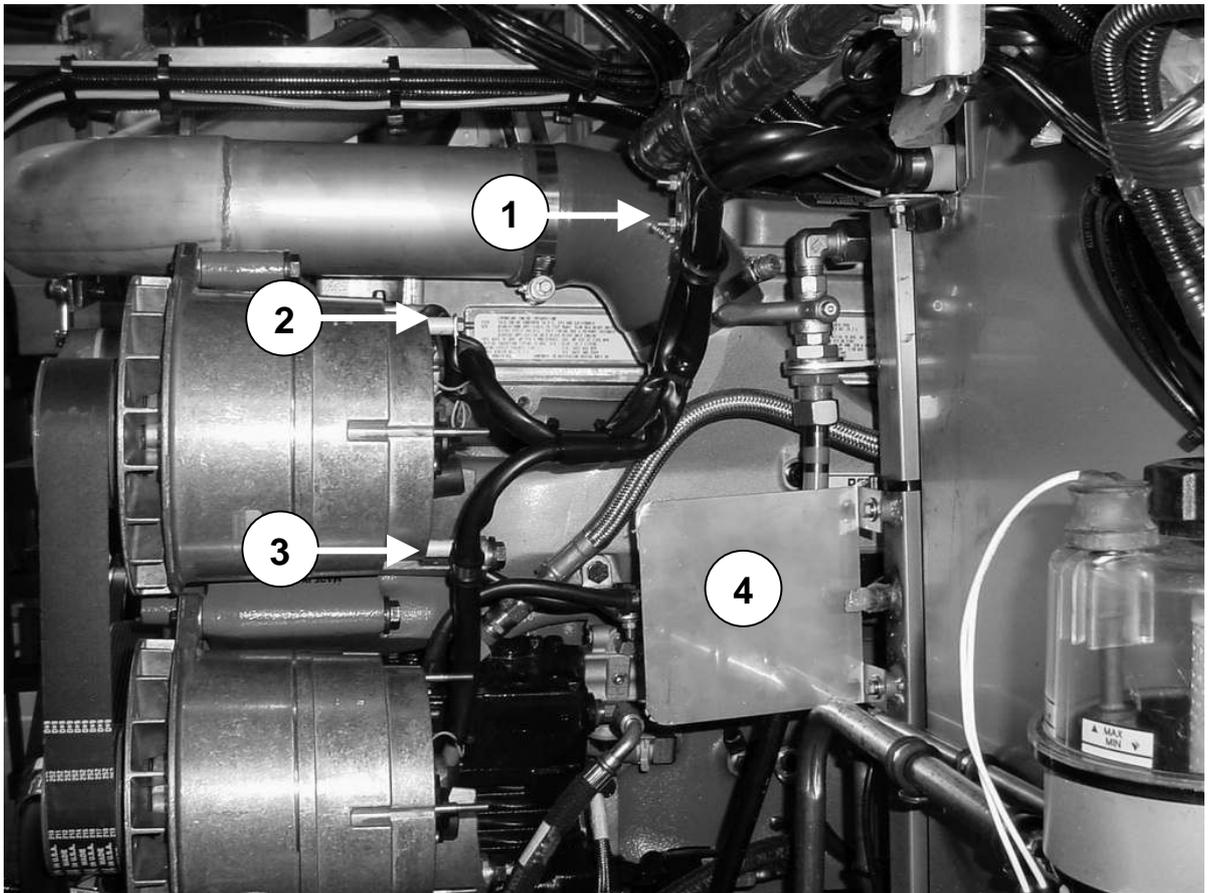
Proper routing of alternator cables and location of heat shield (HVAC compressor not shown):
